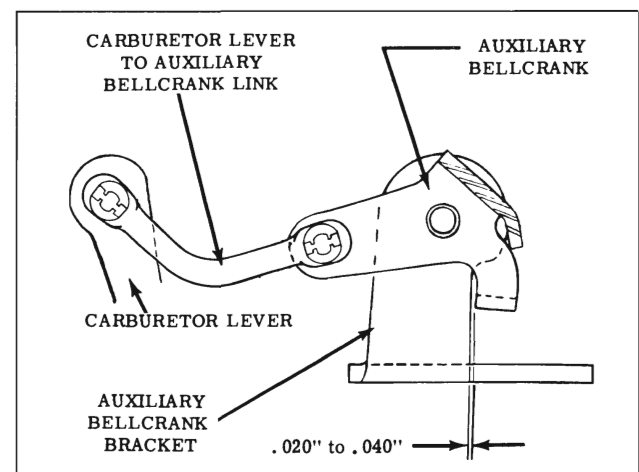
Checking Carburetor Link (2 Bbl.)
